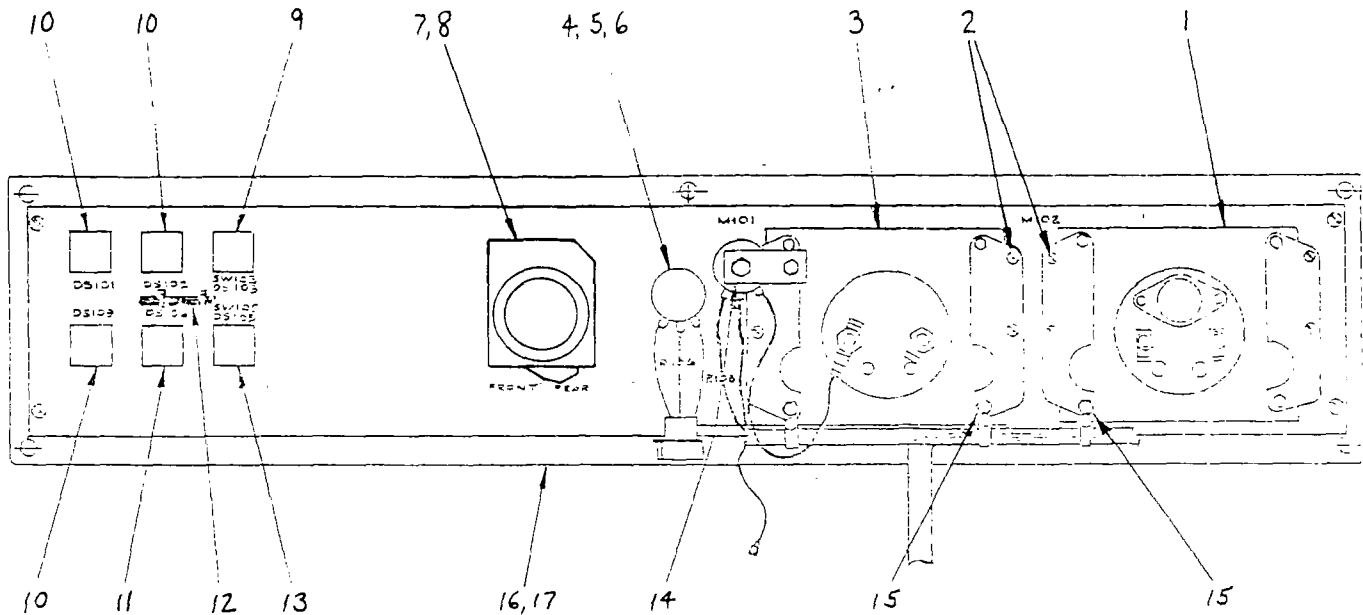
RC-5B PLUS Front Console Panel Assembly (Rear View)
